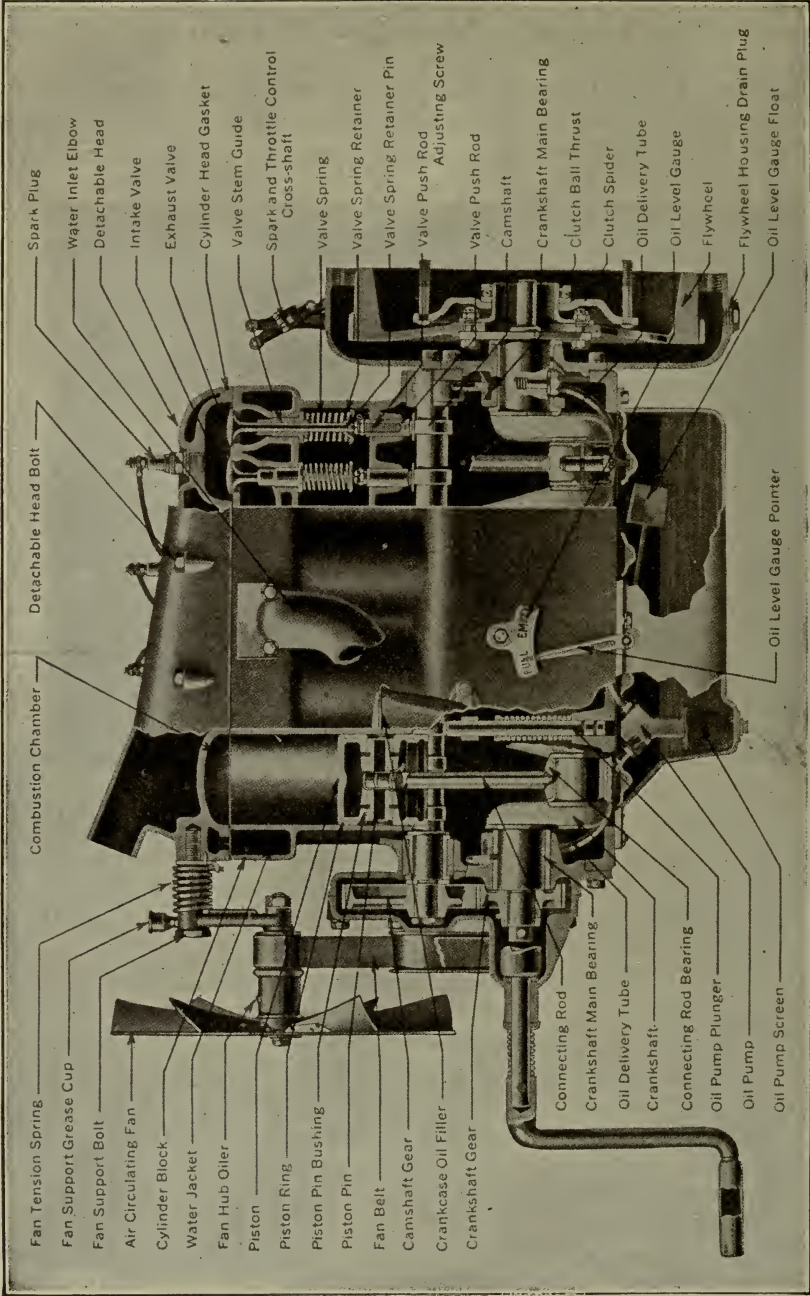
Maxwell engine showing Oil Gauge and Oiling System.
